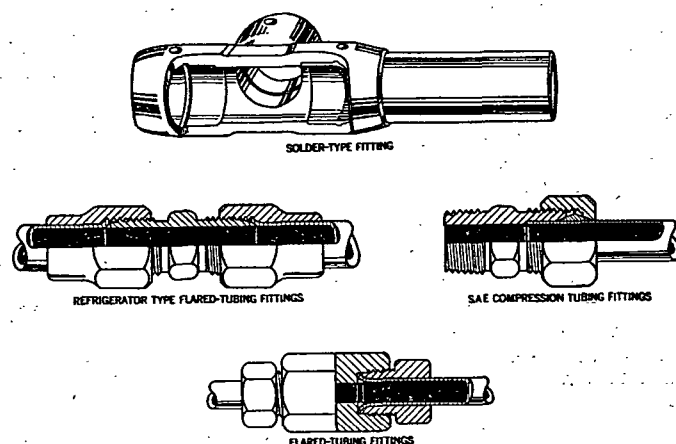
COPPER OR BRASS TUBING FITTINGS
